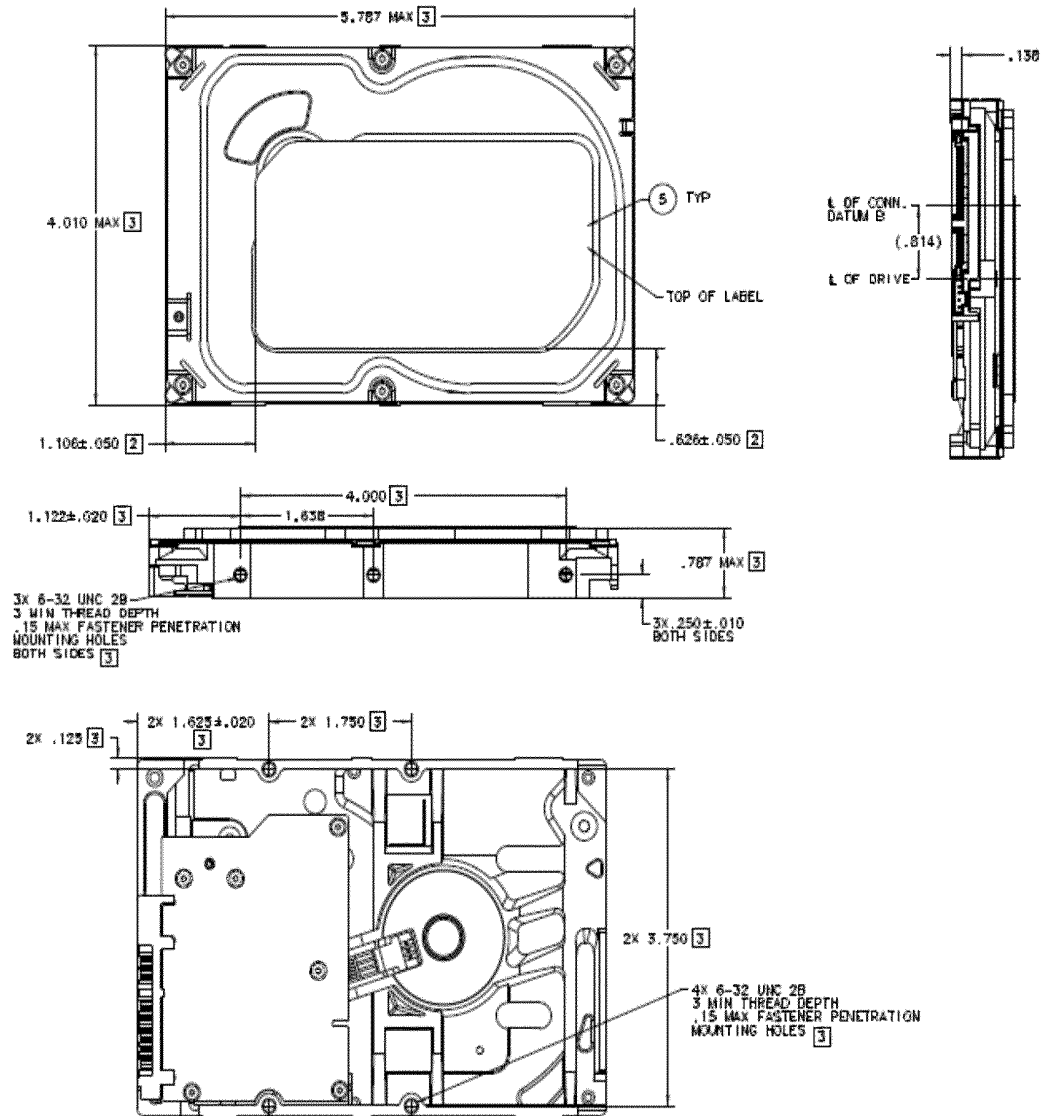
Mounting dimensions (1-Disk: 1TB and 750GB models)
